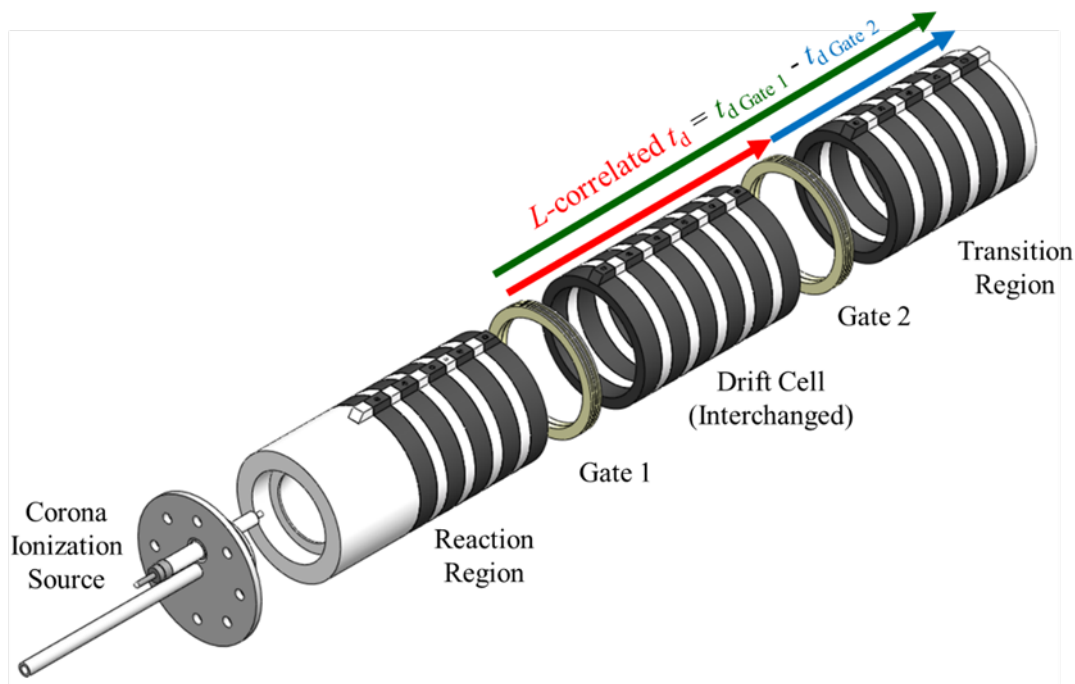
CAD model depicting an exploded view of the six IMS drift tube components.
